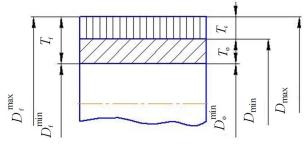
Layout of the tolerance fields of the covered part
